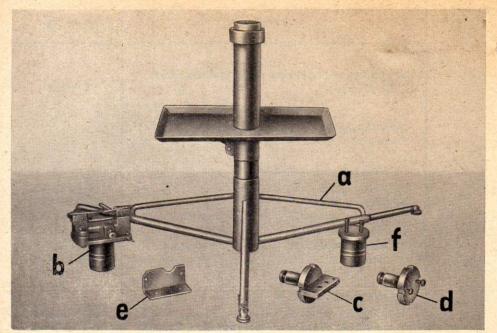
DKW-Universal-Assenmbly-Jig (main unit)
